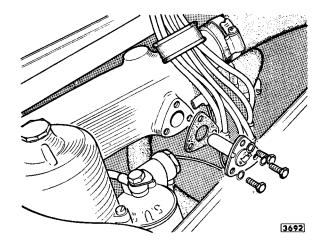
Removing the auxiliary starting carburetter thermostatic switch
